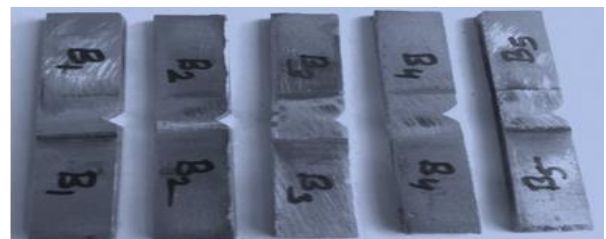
(b) MIG joints using ER309L filler metal specimen for impact test
